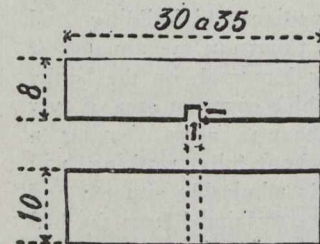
Nicked Prismatic Test Piece for the Impact Bending Test.
